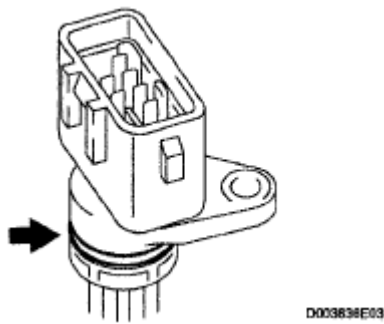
Locating O-Ring Of Transmission Wire Connector With ATF
